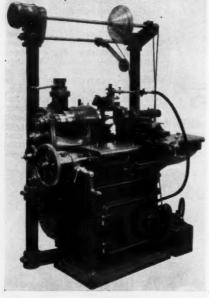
Duplicate operating controls on the left side of machine. The grinding of left-hand end mills or face mills is simplified by eliminating the necessity of a makeshift tooth rest set-up.
